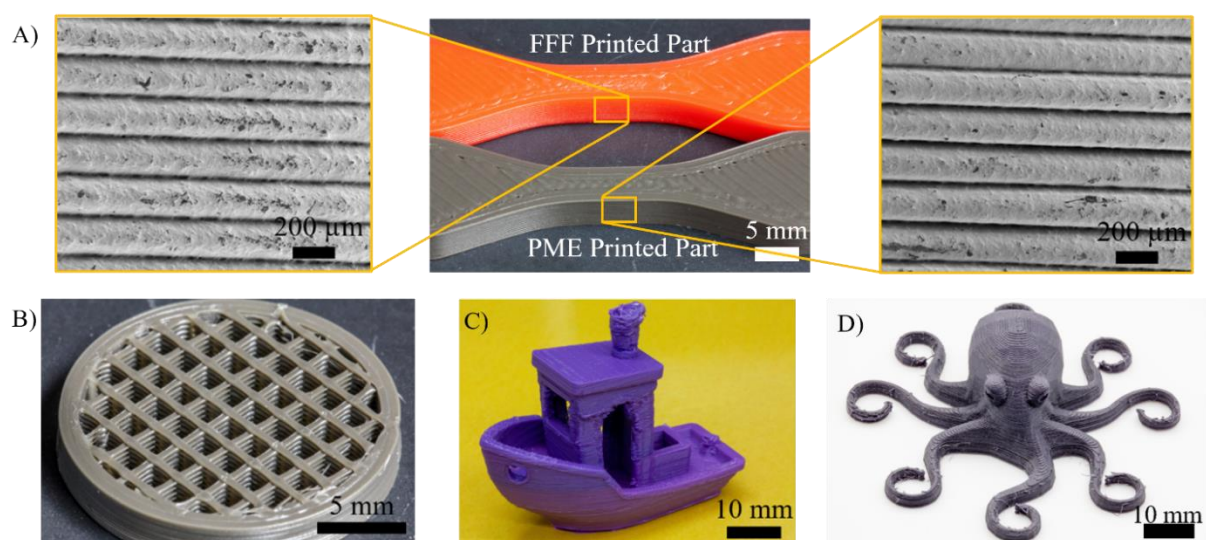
(A) SEM images showing the layer lines of PCL printed with the PME and FFF printer (B) Optical image showing a single infill of a PME printed object (C) PME printed benchmark model (D) PME printed octopus.
